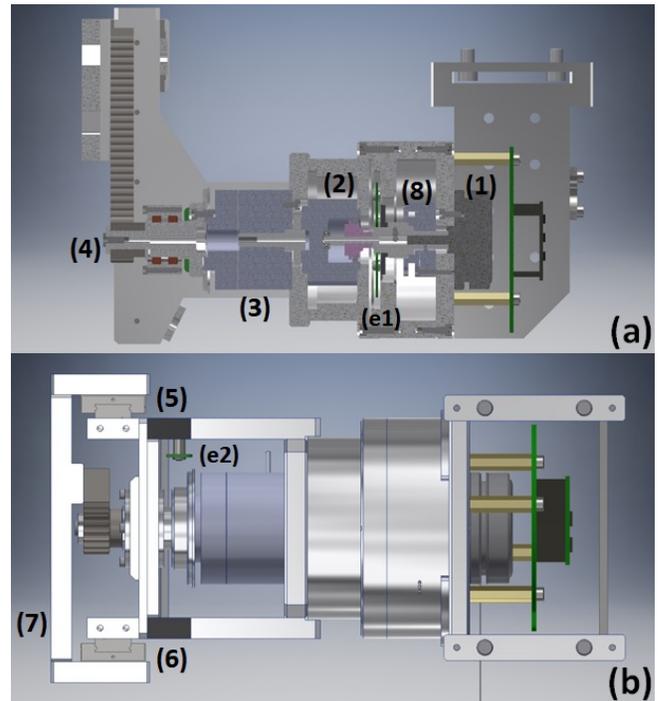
3D model of linear actuator design: (a) cut section side view, (b) top view. The electric motor (1) is connected to the harmonic drive (2), which acts as the speed reducer. It is then connected to the clutch (3), and finally a rack and pinion gear pair (4) converts rotary motion to linear motion. (5) and (6) are linear guides to support the linear movement. (7) is the output attachment. (8) is the motor brake. (e1) is the encoder before the clutch and (e2) is the encoder after the clutch.
